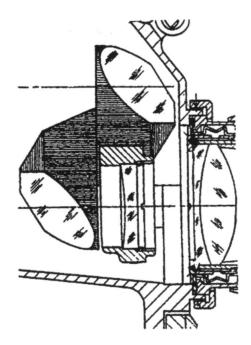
A section of the optomechanical layout of the Binocular M19 (from Fig. 4.31), showing the erecting prism assembly, its mounting bracket, and the lens/reticle mounting. (Adapted from a U.S. Army drawing.)
